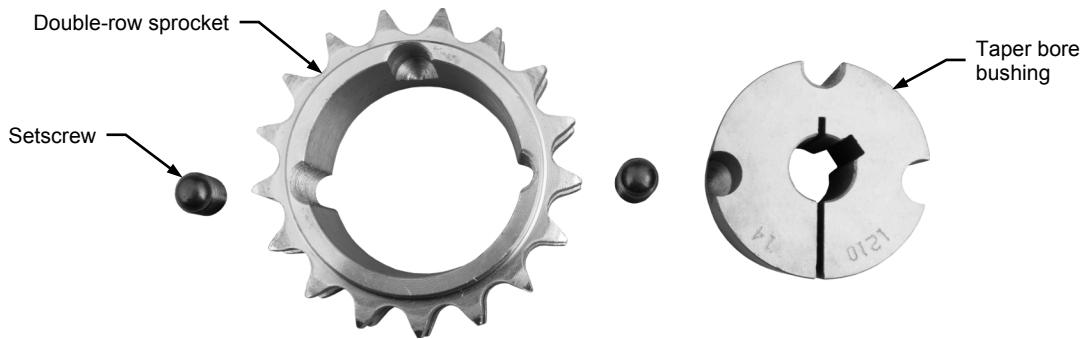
Dismounted taper bore sprocket and bushing assembly.
